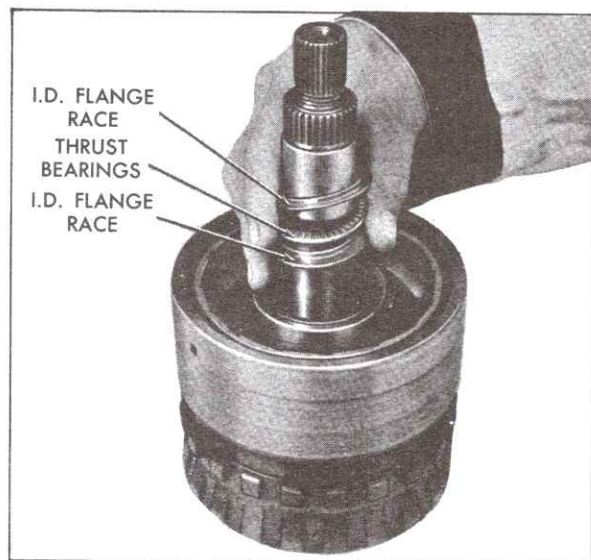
Installing Center Support Races and Thrust Bearing at Sun Gear
